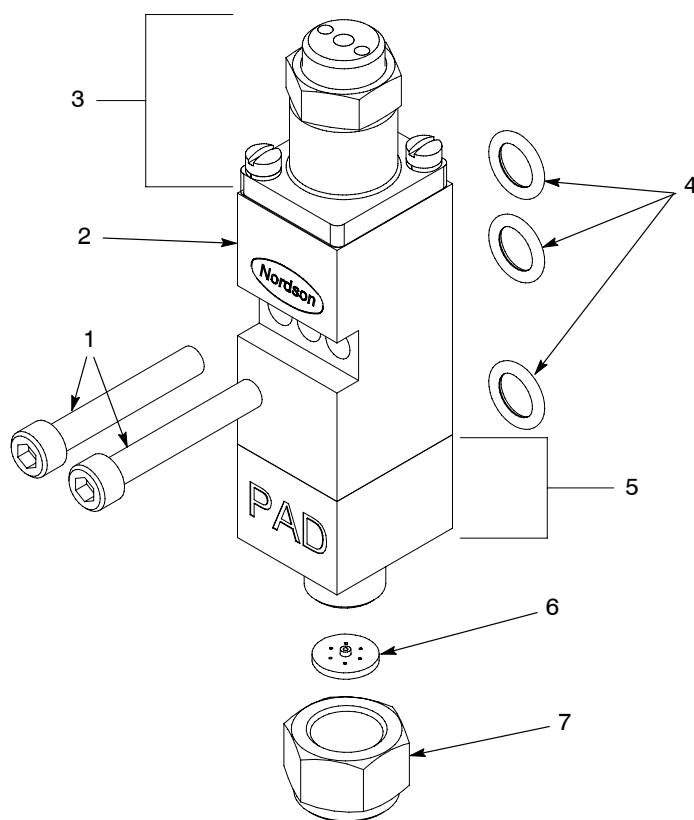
Key parts of a CF200PAD module (standard module shown)
